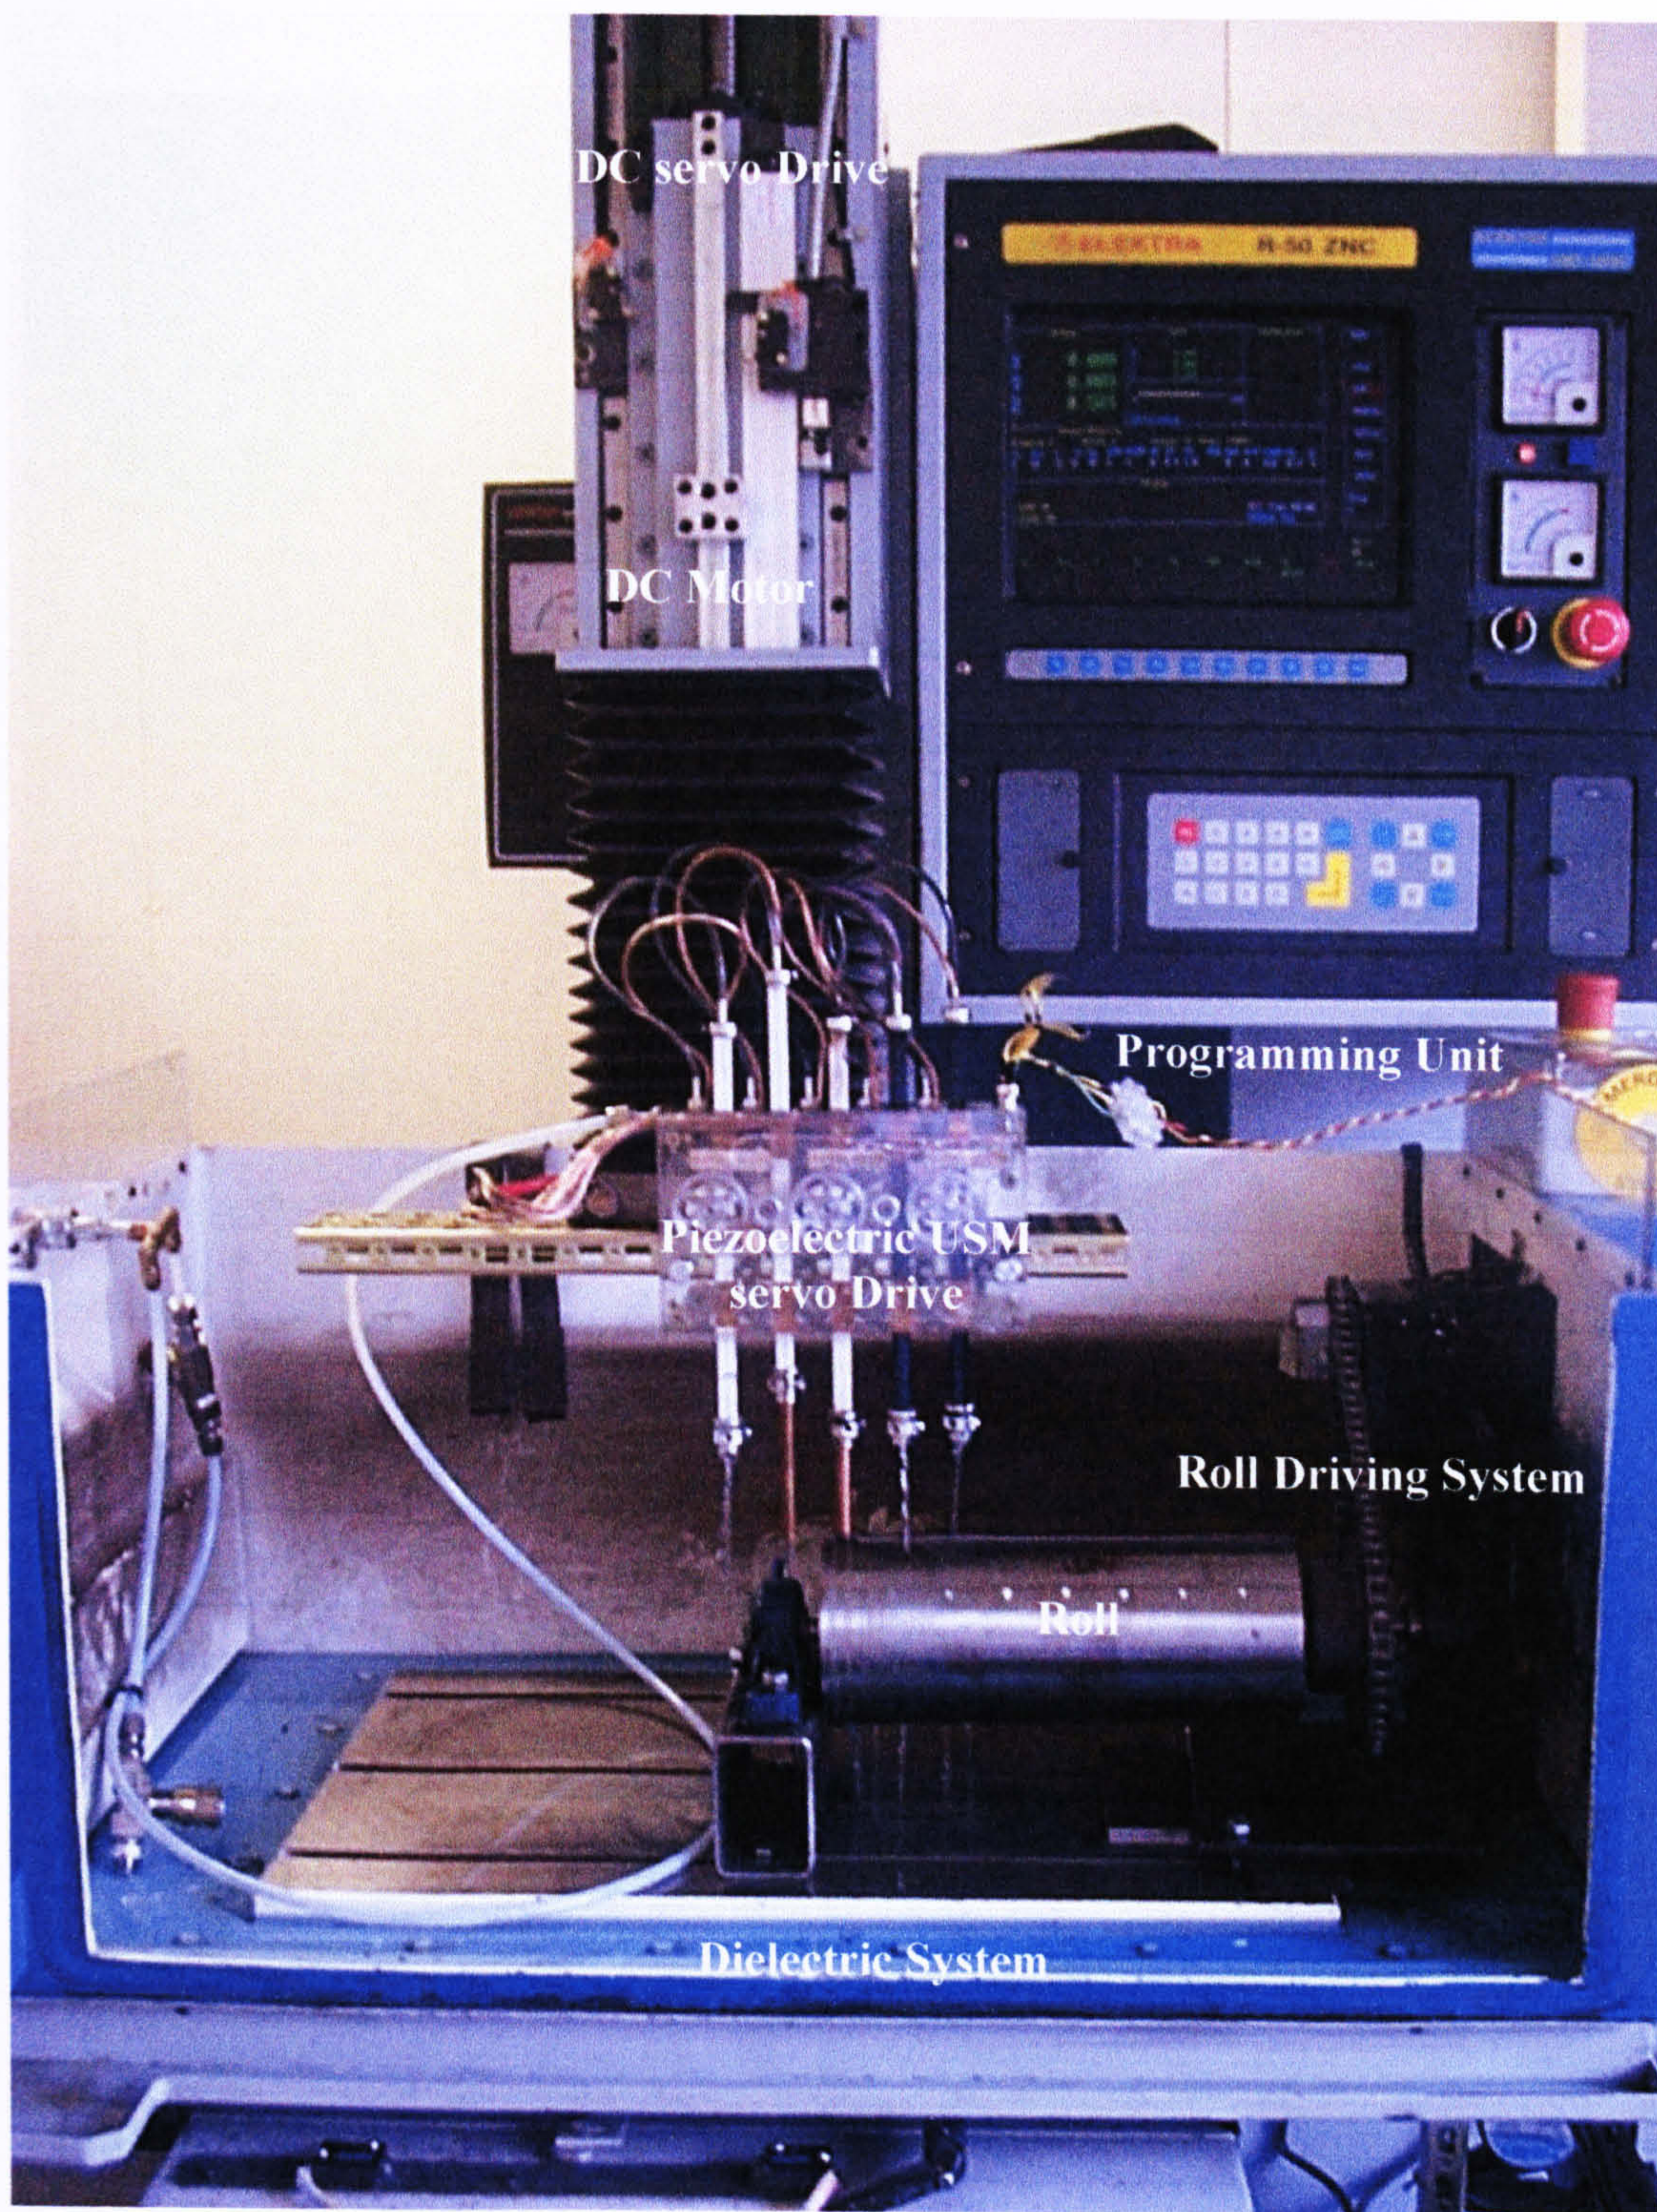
Installation of the developed drive using piezoelectric USM in a five head arrangement in the EDT-machine
